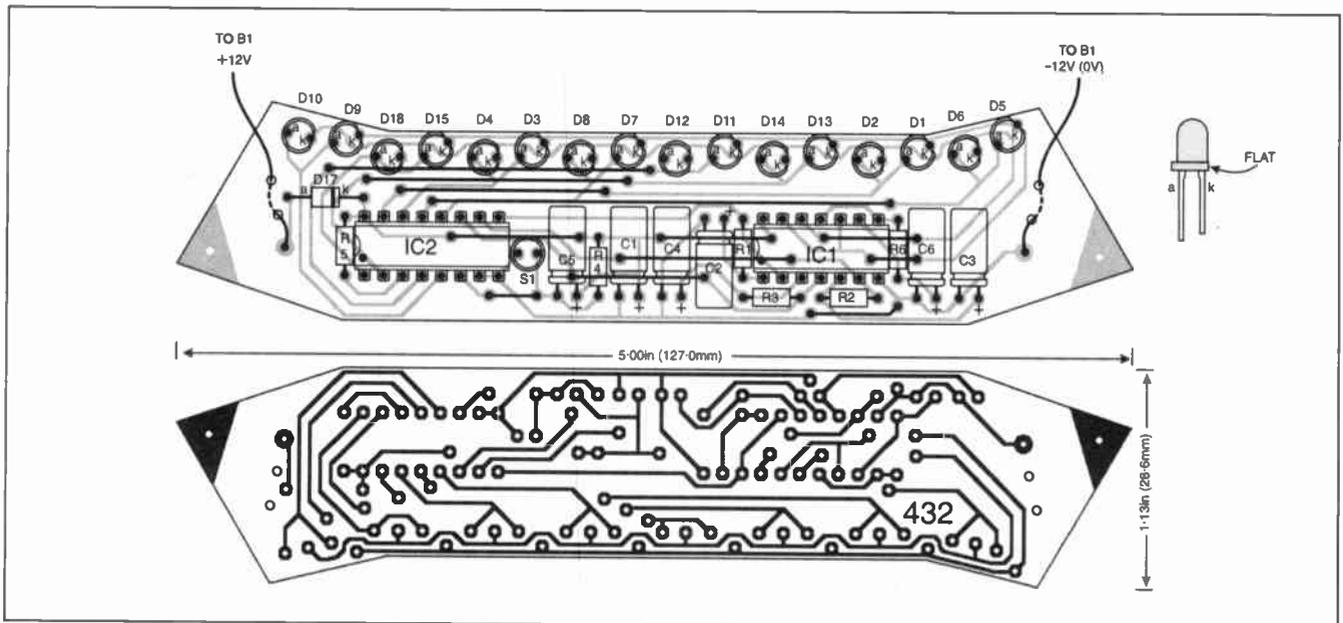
Printed circuit board topside component layout and full-size underside copper foil master for the Jazzy Necklace. Cover the back of the p.c.b. with some felt or other fabric to prevent it from scratching the skin.
